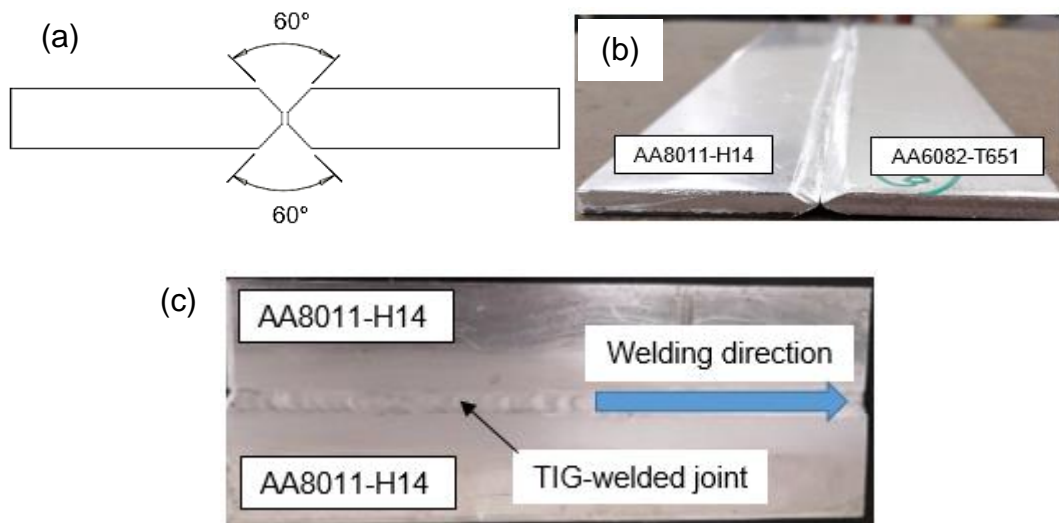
(a) Double V-shaped groove diagram; (b) plates configuration; (c) sample of a TIG-welded joint.
